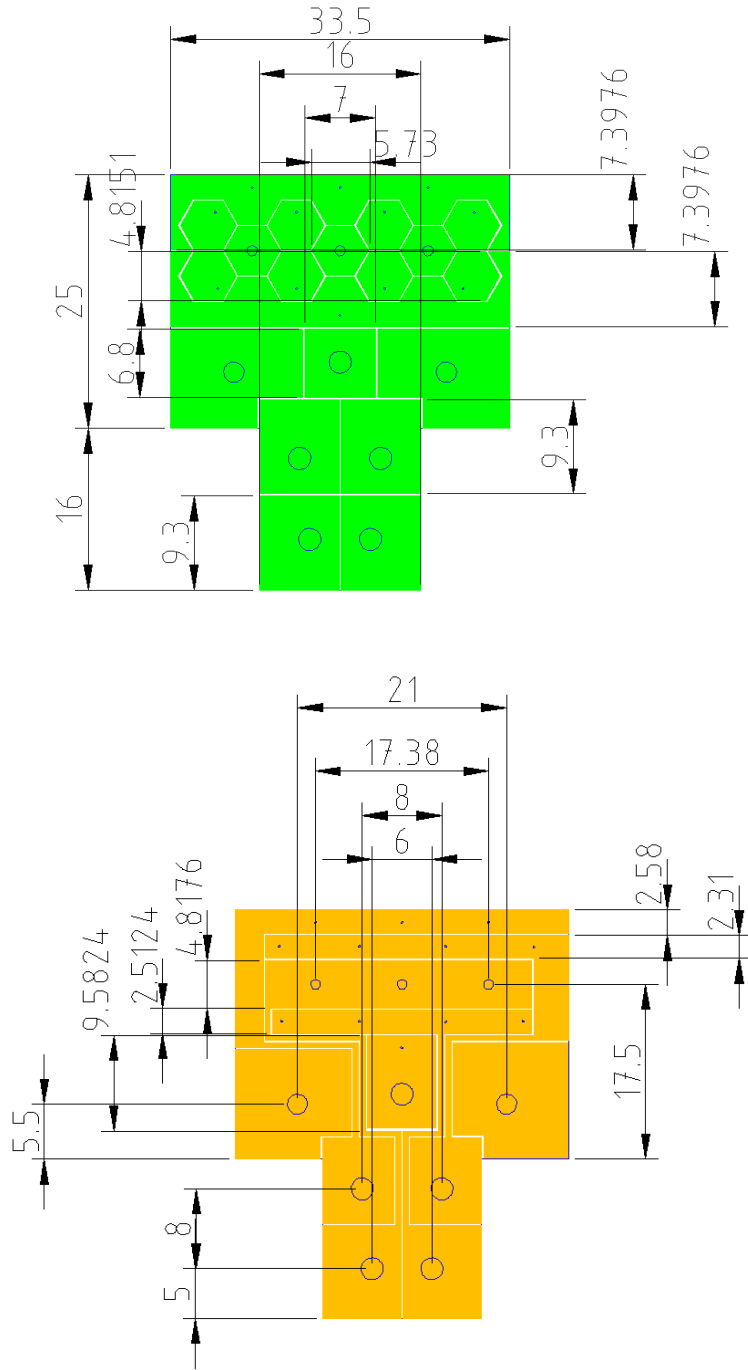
PCB trap board design, with electrodes labelled.
